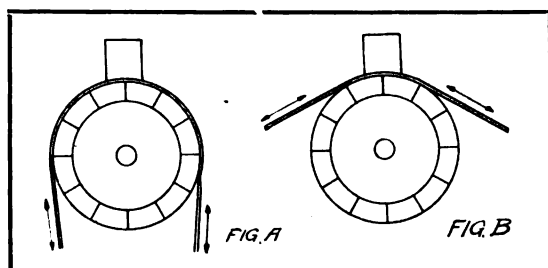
Proper and Improper Method for Fitting Brushes to the Commutator of Generator.
